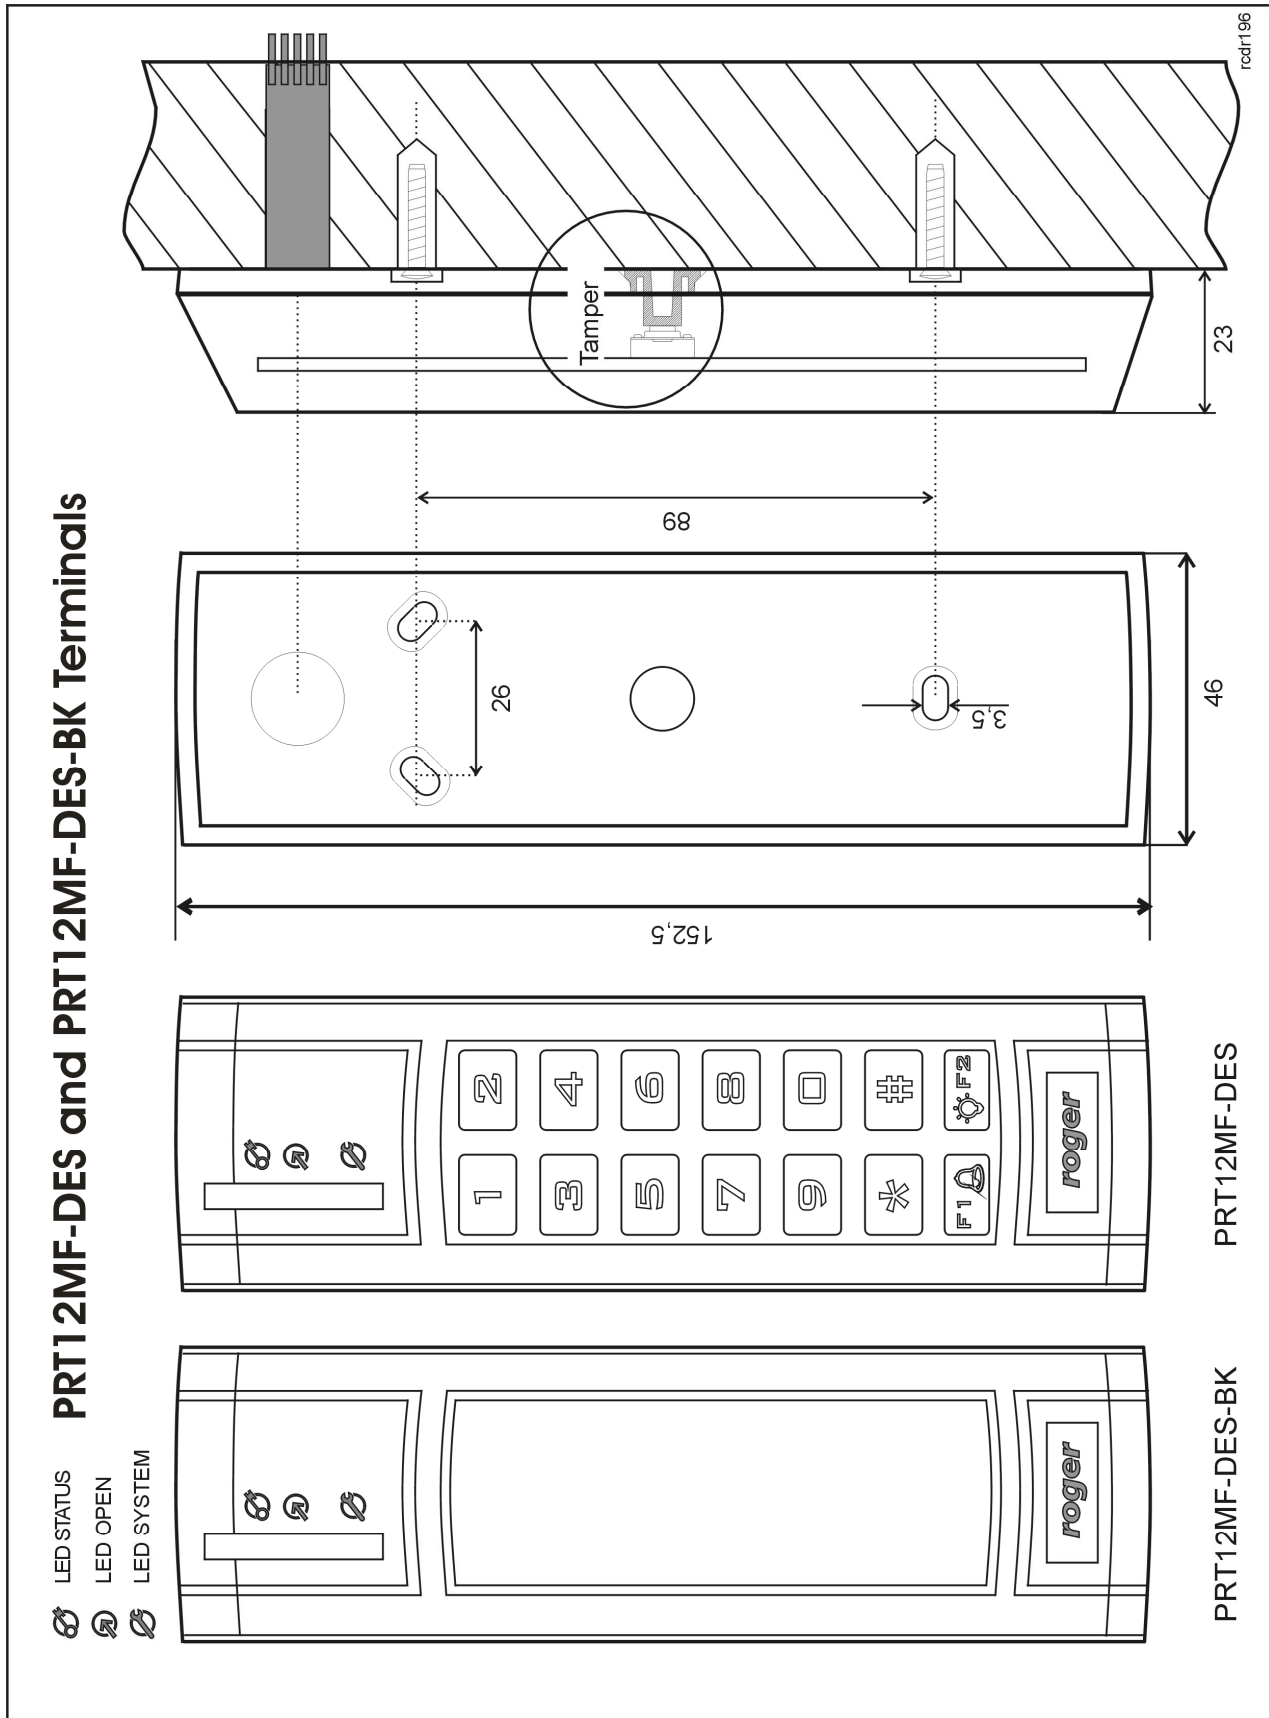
Dimensions and tamper details, standard (low profile) bottom enclosure.
